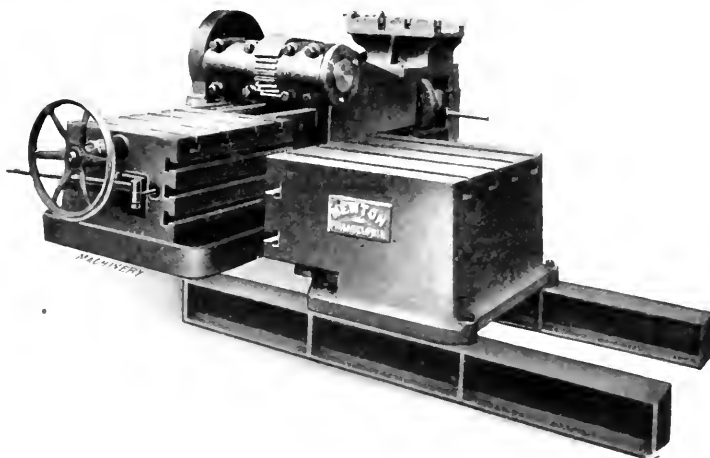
Side View of Newton Cold Saw showing Auxiliary Table carried on Parallels
